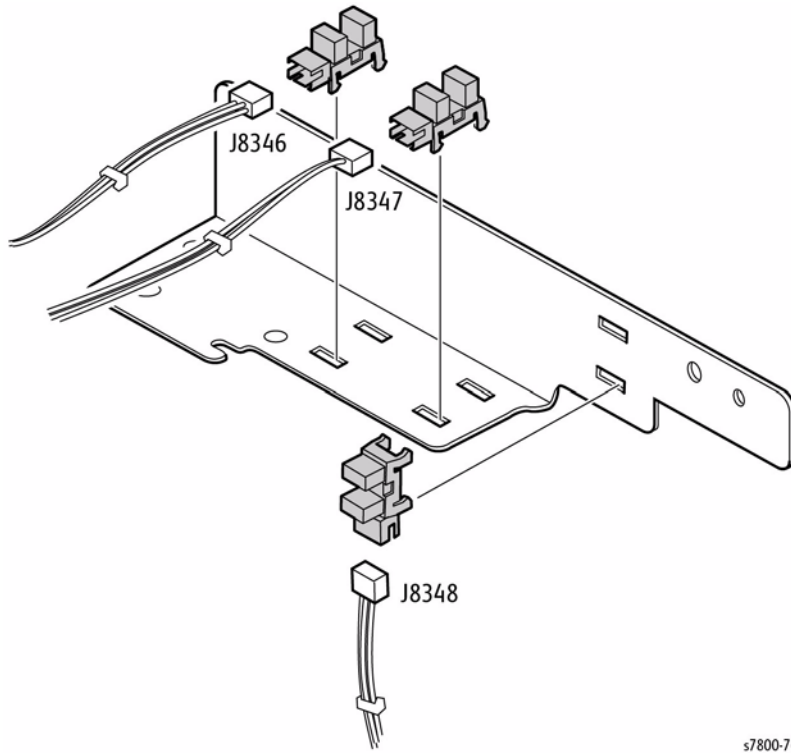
Removing the Hole Select Punch, Front Punch, and Home Punch Sensors
